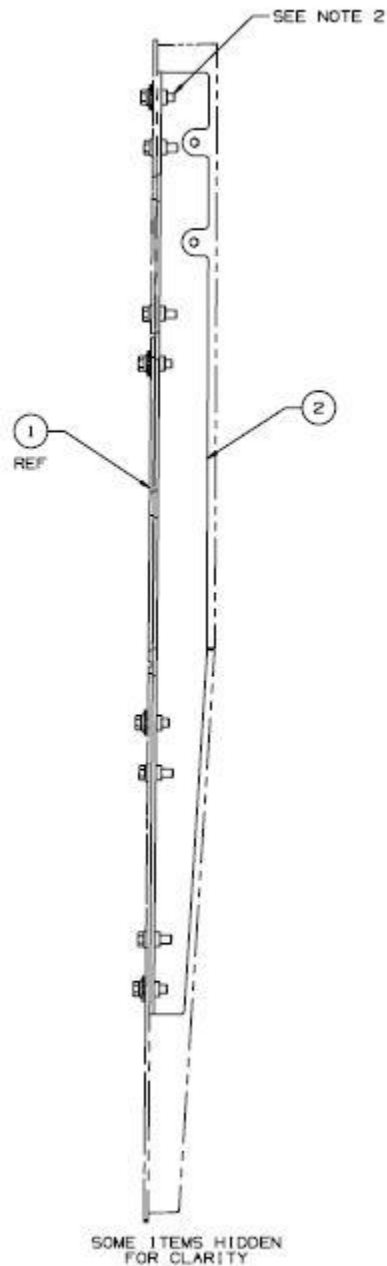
SHOWN WELD DETAILS FOR REWORK
